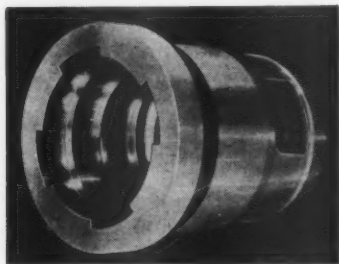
VALVE CAGE FOR SUPERHEATED STEAM OF SILICON-MONEL METAL.
